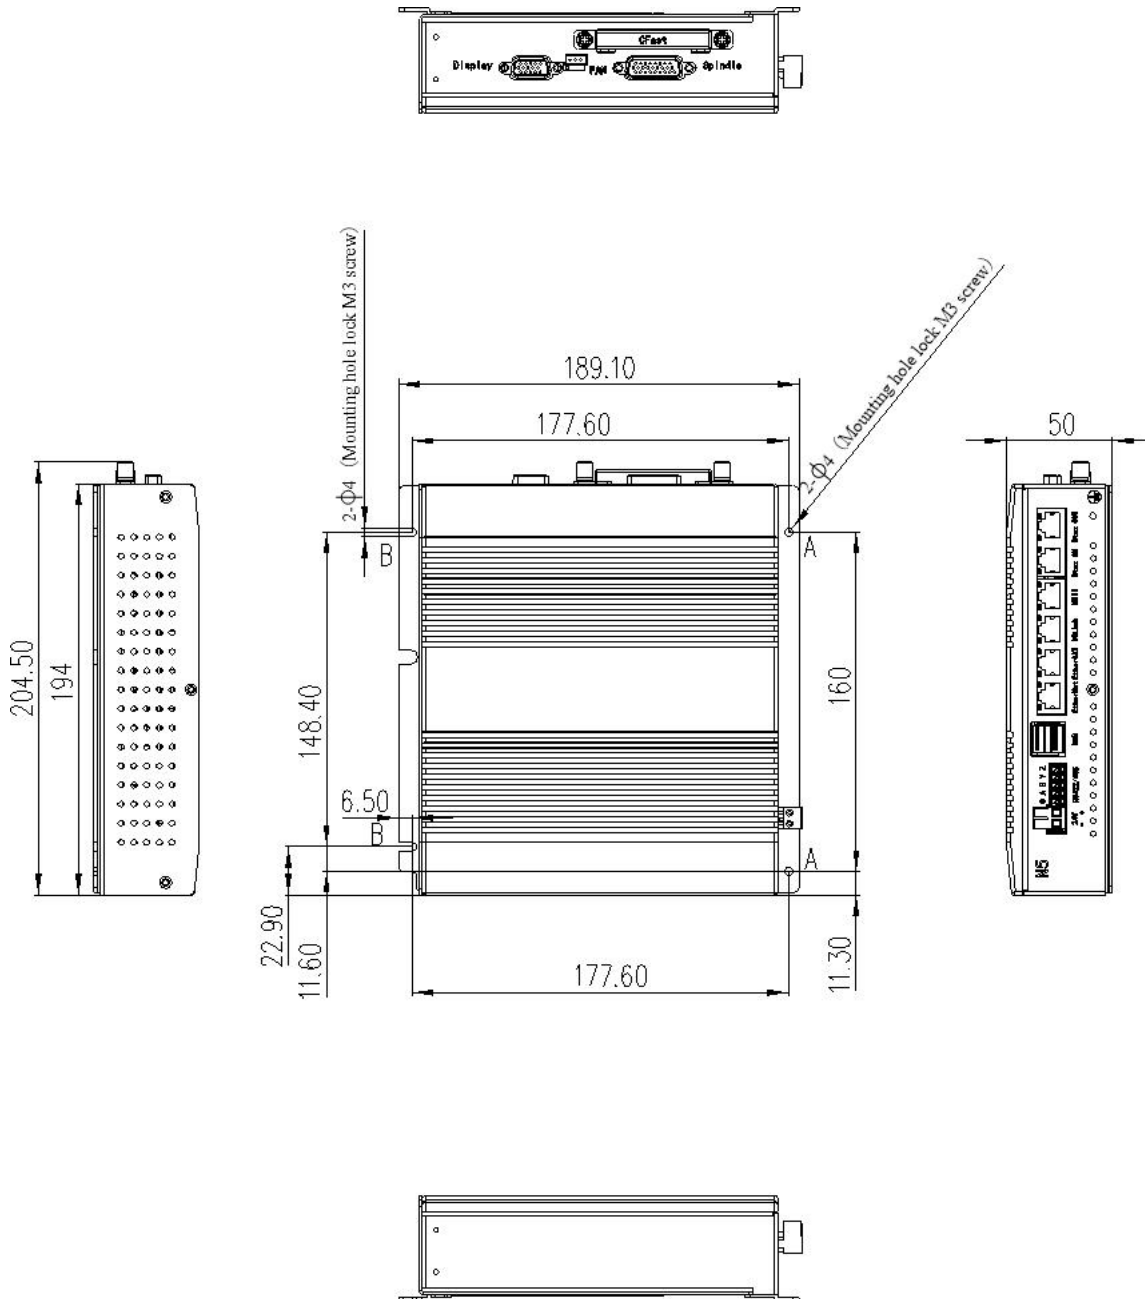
N5 Monoblock Controller Mounting Hole Dimensions
